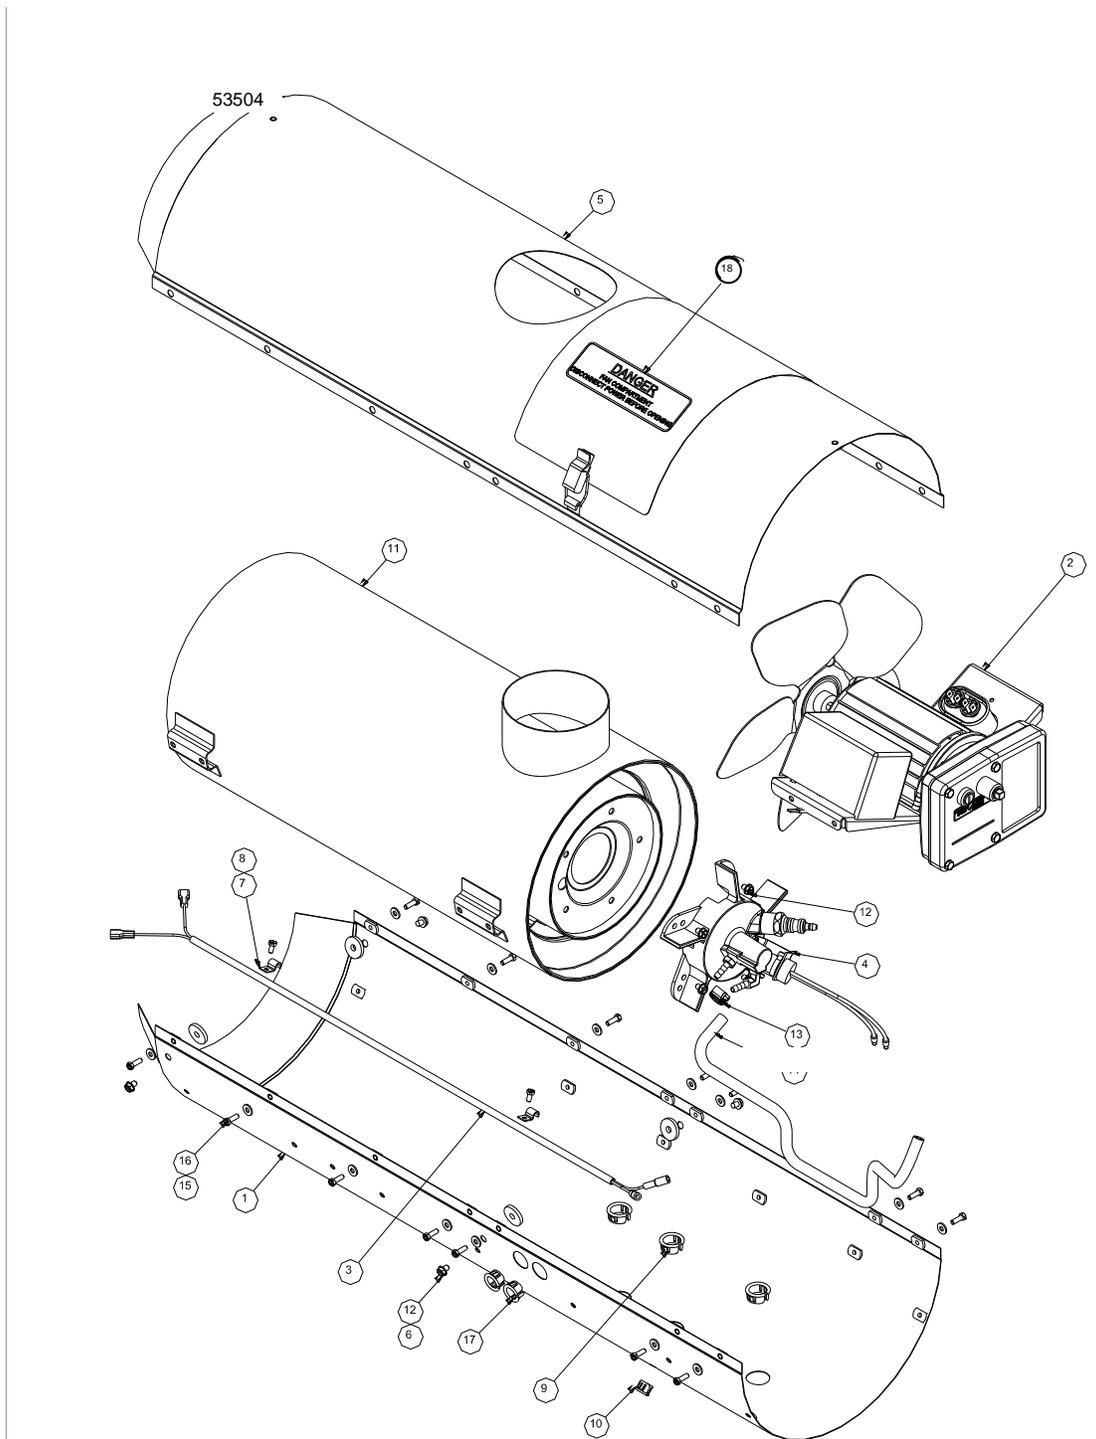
COMBUSTION CHAMBER ASSEMBLY
